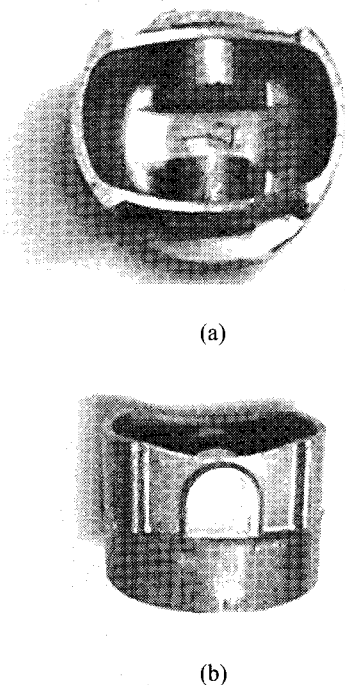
Final product of Aluminum automotive piston (a) Top view, (b)Side view
